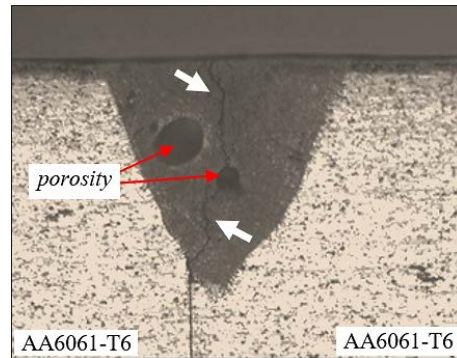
Solidification cracks (white arrows) observed in the weldment of similar AA6061-T6 joint made using 310 W and 24 mm / s.
